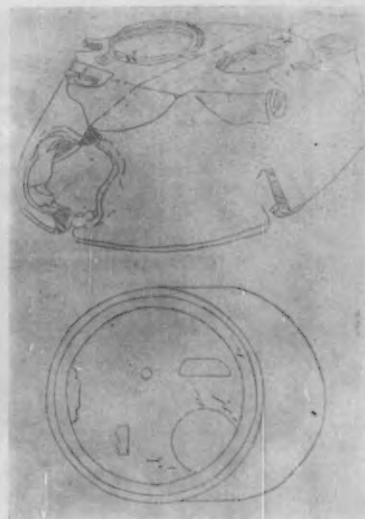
Number and location of crack-like defects are kept on illustrated data sheets used with magnetic particle inspection.
